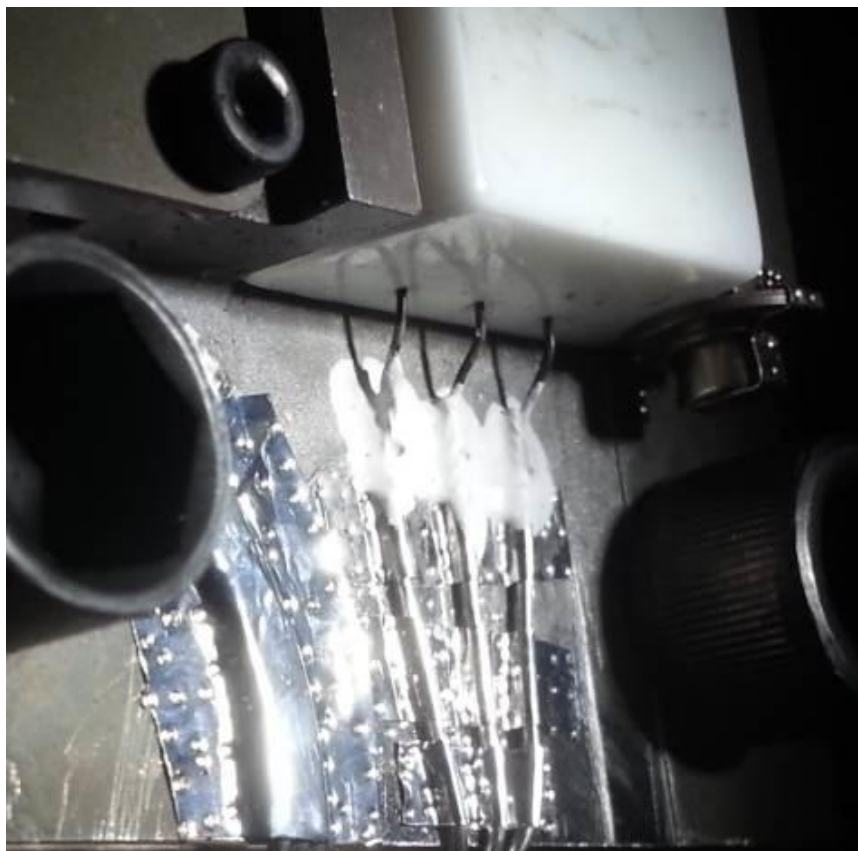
Rotating Antenna Pins before Spin Test, Side View
